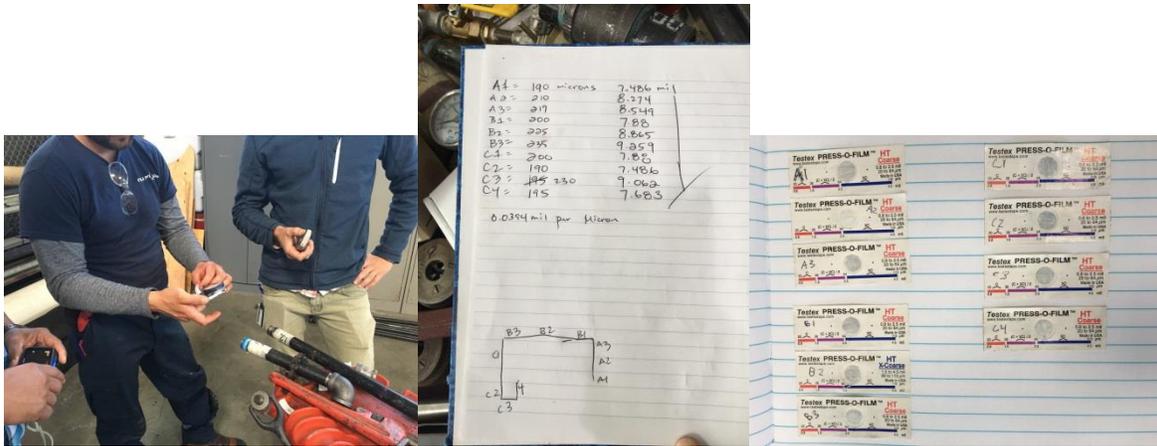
Anchor Tooth Measurement for Pipe Segment no. 12 Cross-Sections.
